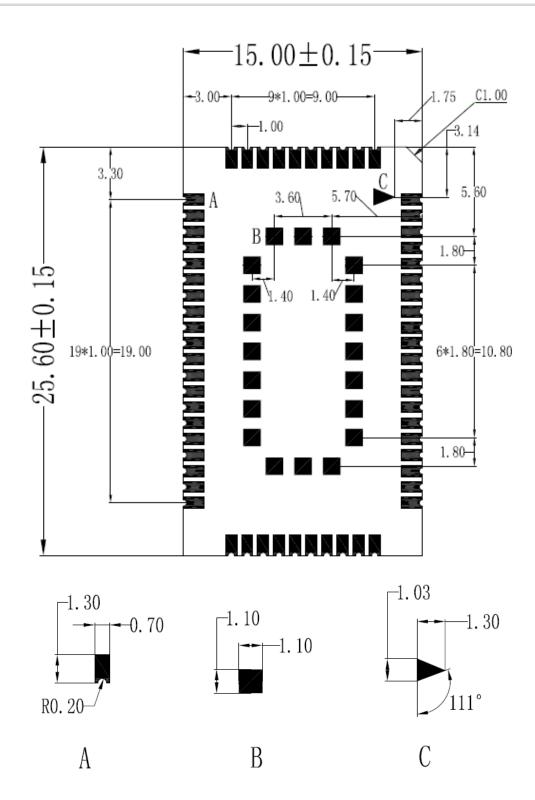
Bottom Dimensions (Bottom View) (Unit: mm)
